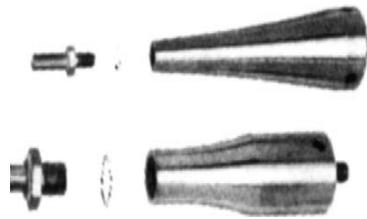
Amplifying tool holder and mechanically attached tools used for USM.
